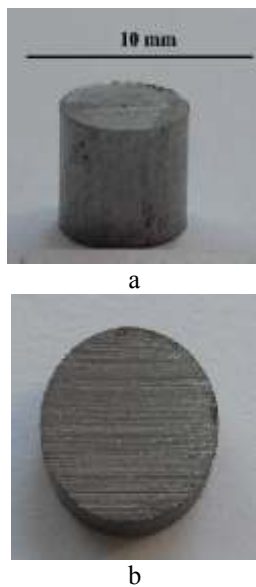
Aspect of initial and worn surface after the abrasion test of carburized in fluidized bed specimens
